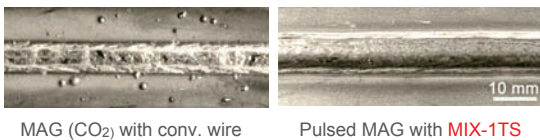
In galvanized plate welding, pulsed MAG with MIX-1TS results in a good bead look without spatter adhesion (right) whereas MAG (CO<sub>2</sub>) welding with conventional wire exhibits much spatter particles adhered and porosity (left).
